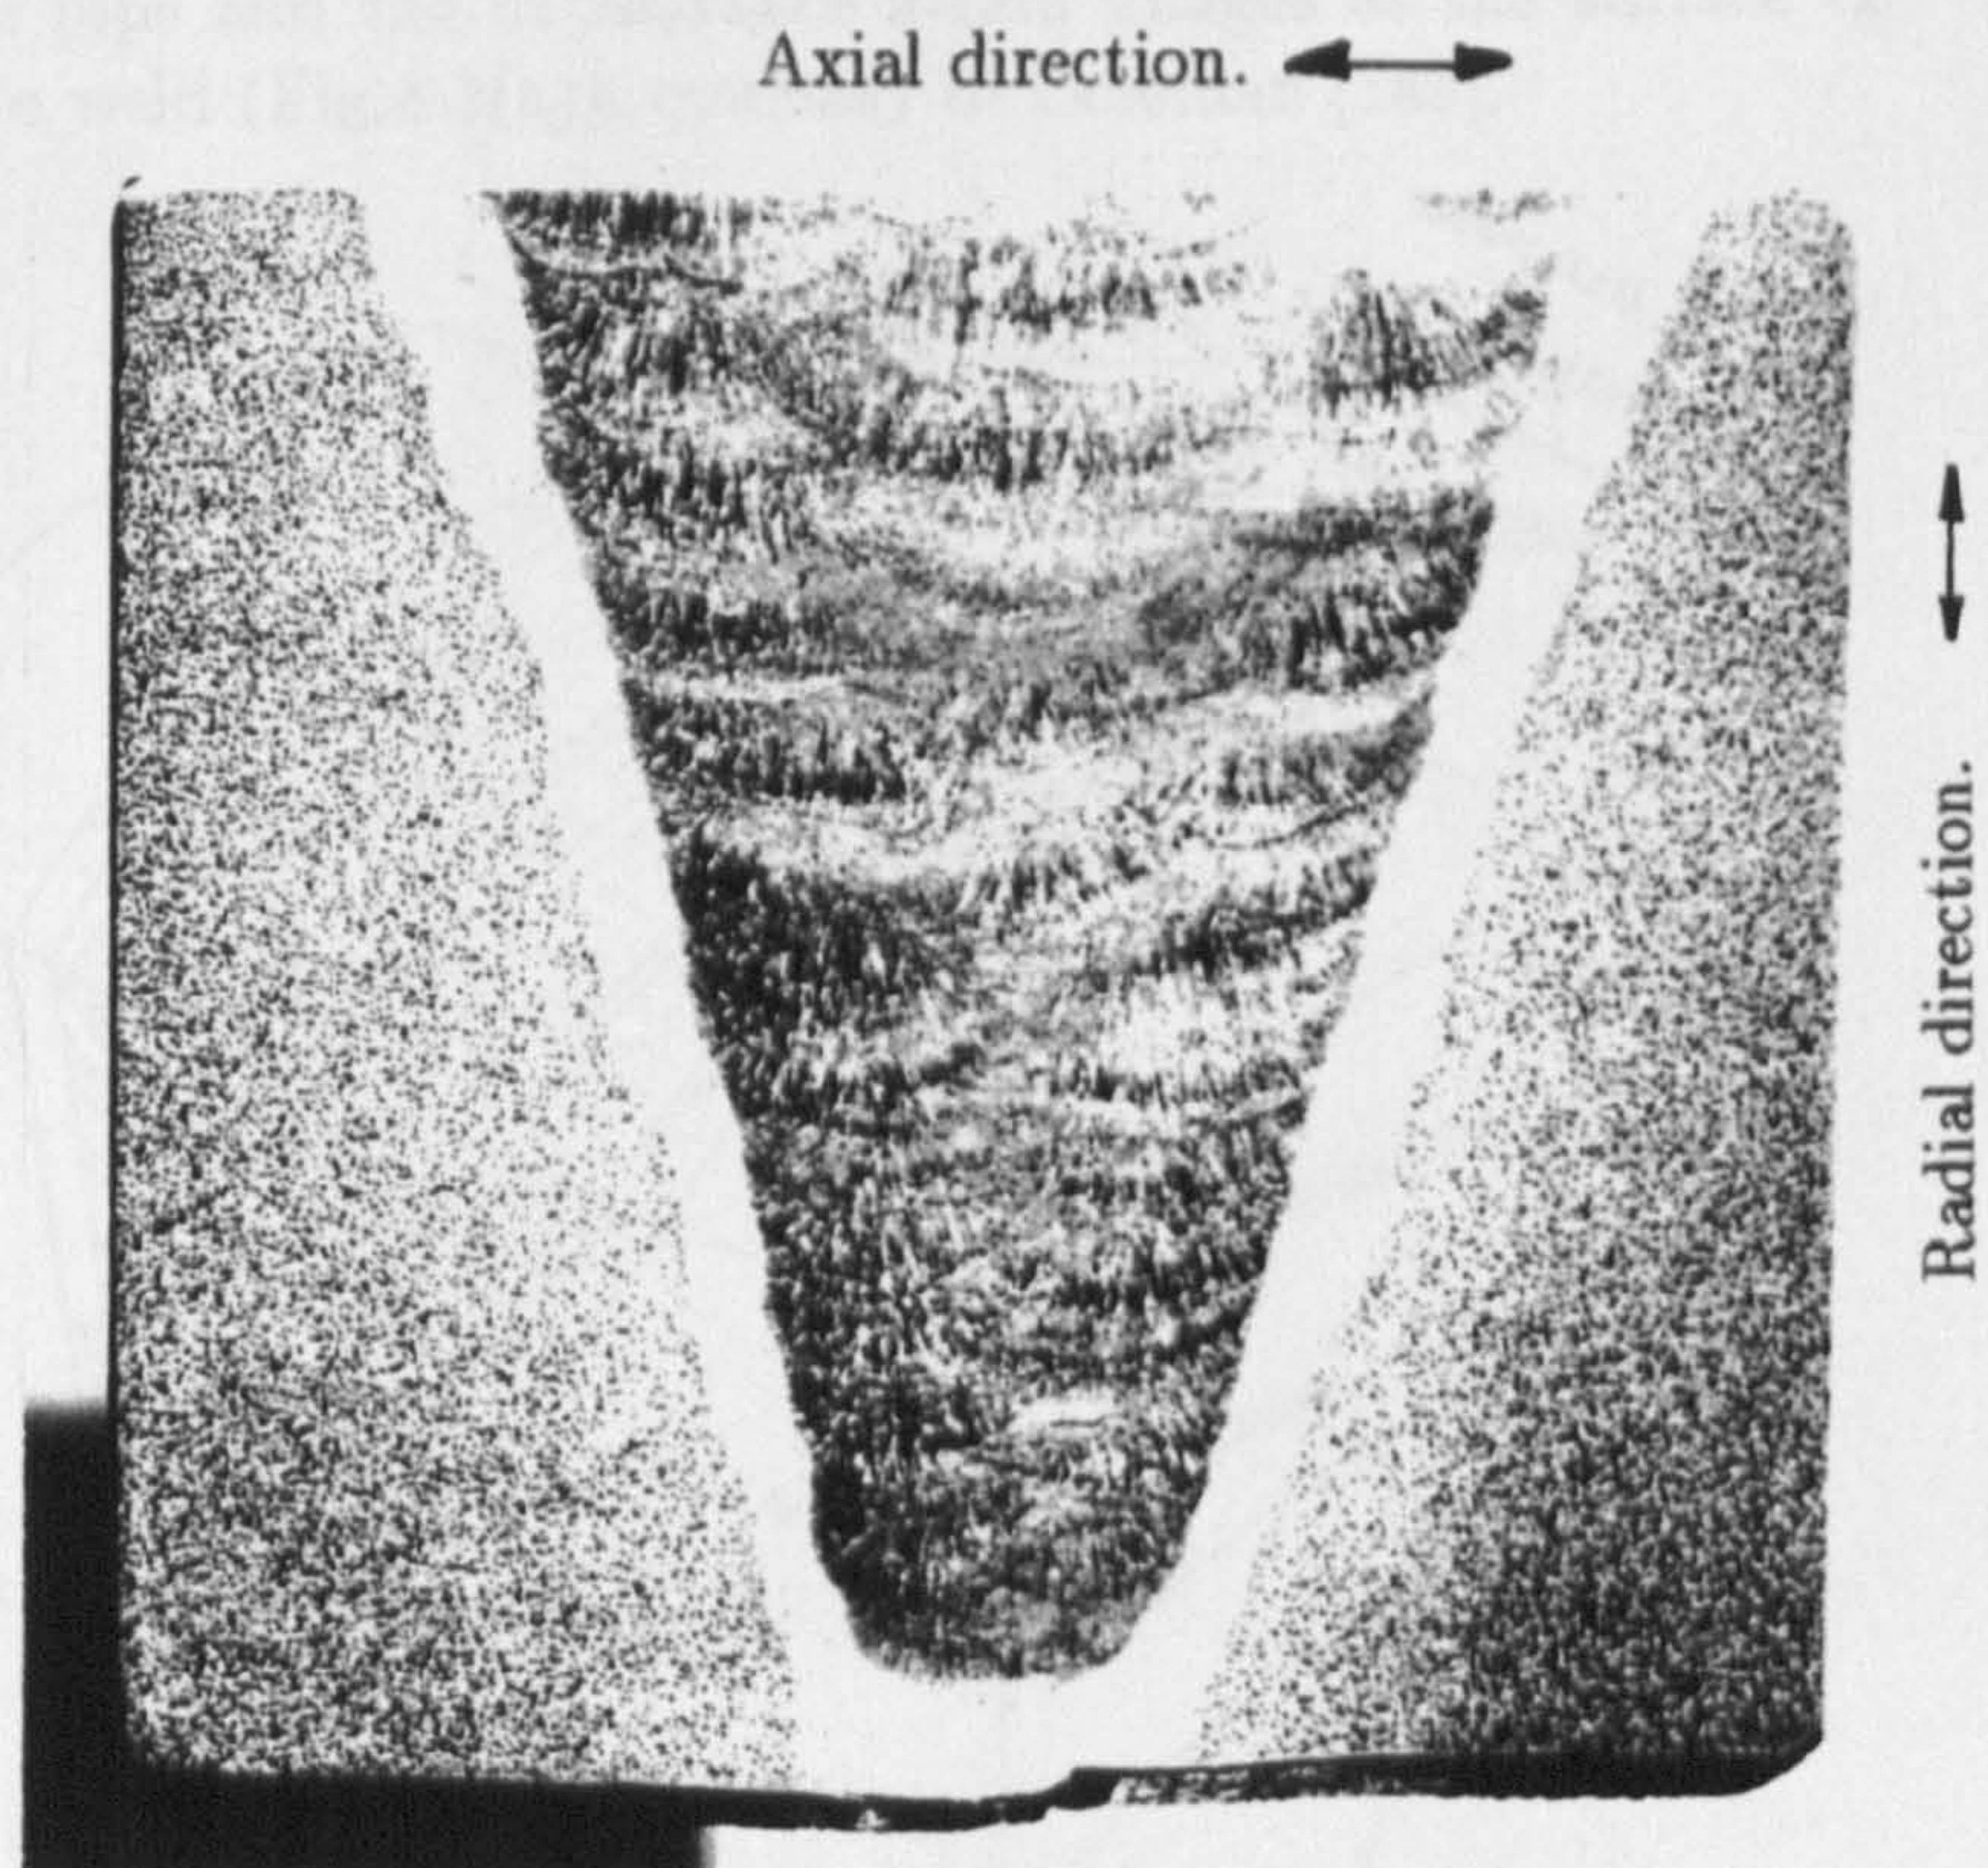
Micrograph showing a section through a 2.25Cr 1Mo:0.5Cr 0.5Mo 0.25V multipass weld, identical to the welds used in the thick steam pipe tests of Coleman et al [131].
